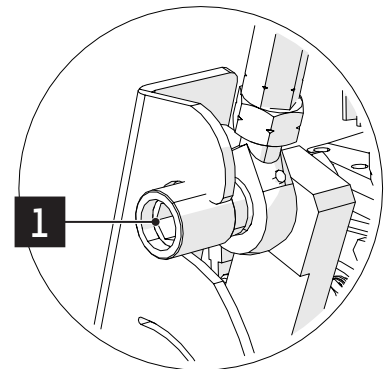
Detail of the screw fixing the connecting rod onto the gear motor shaft.
